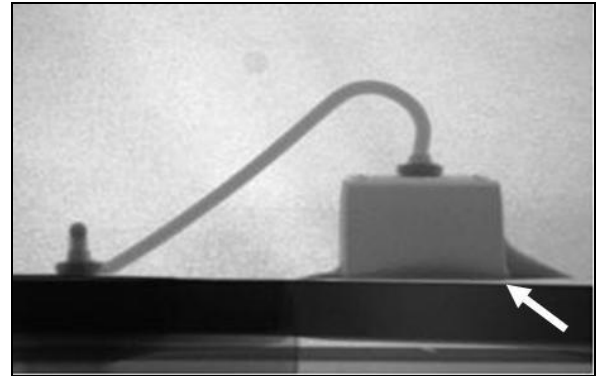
Example of component damage (disruption between lead frame and chip-glue)
